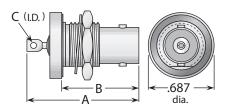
(Rear mount, hermetically sealed, with mounting gasket)
